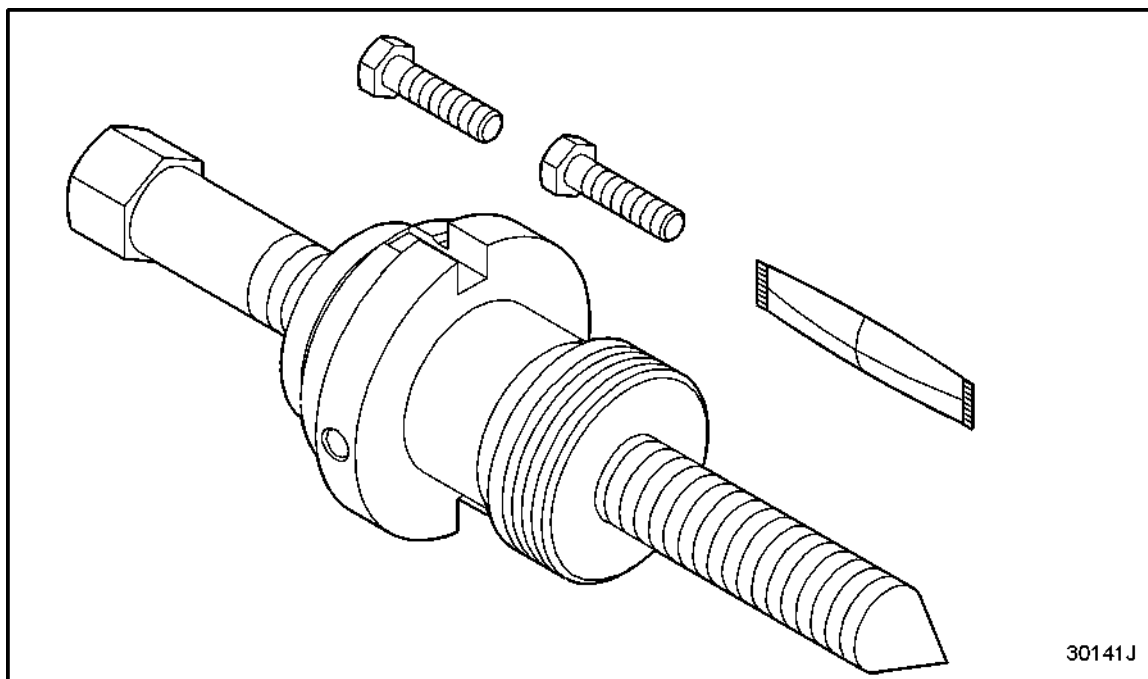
Puller Remover (Rubber Bushed),J 5356
